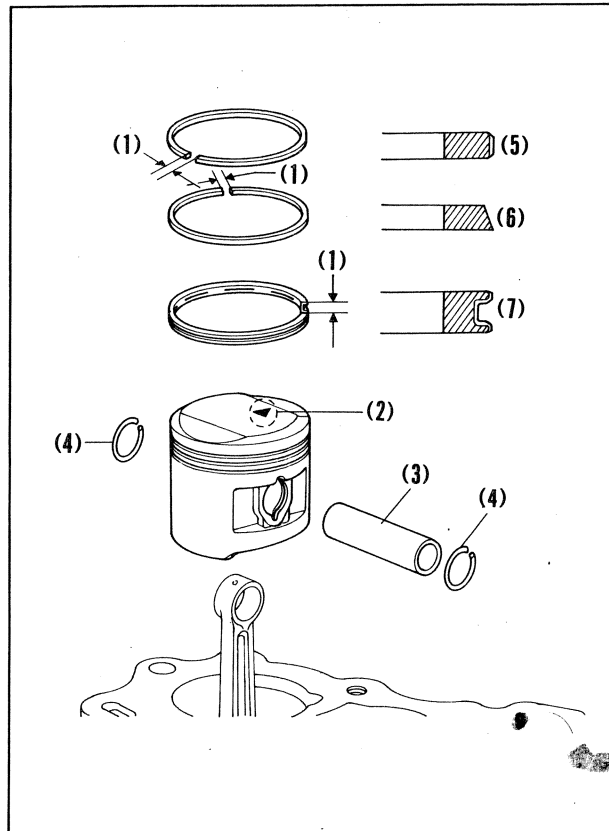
(1) Piston ring gaps (5) Top ring
